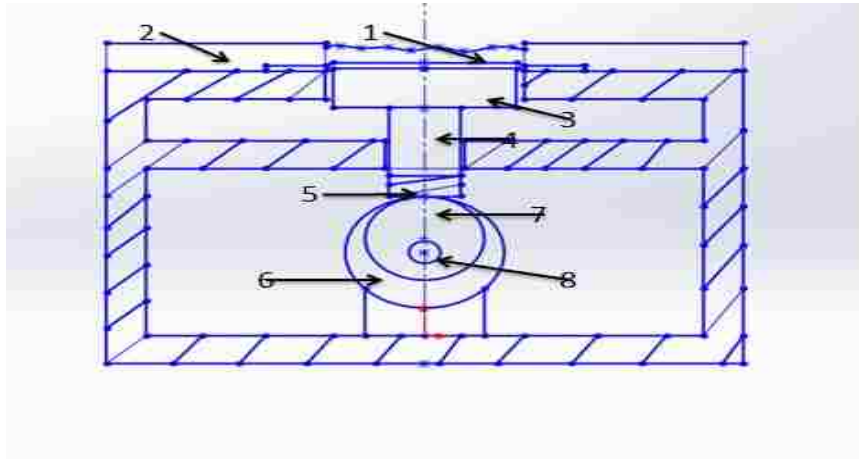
Working process of the radical device: 1- Media; 2- Fix cup; 3- Applicator; 4- Rod; 5-Spring; 6- Electric motor; 7- Cam; 8- Axis (this figure is re-drawn based on the original figure from [18])
